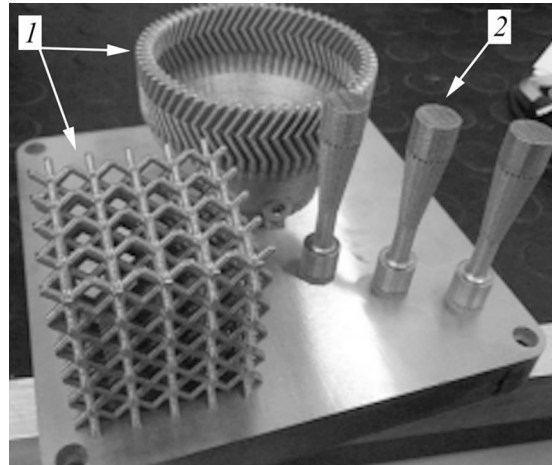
General view of the tensile specimens produced by selective laser melting: (1) finished components; (2) test specimens.
